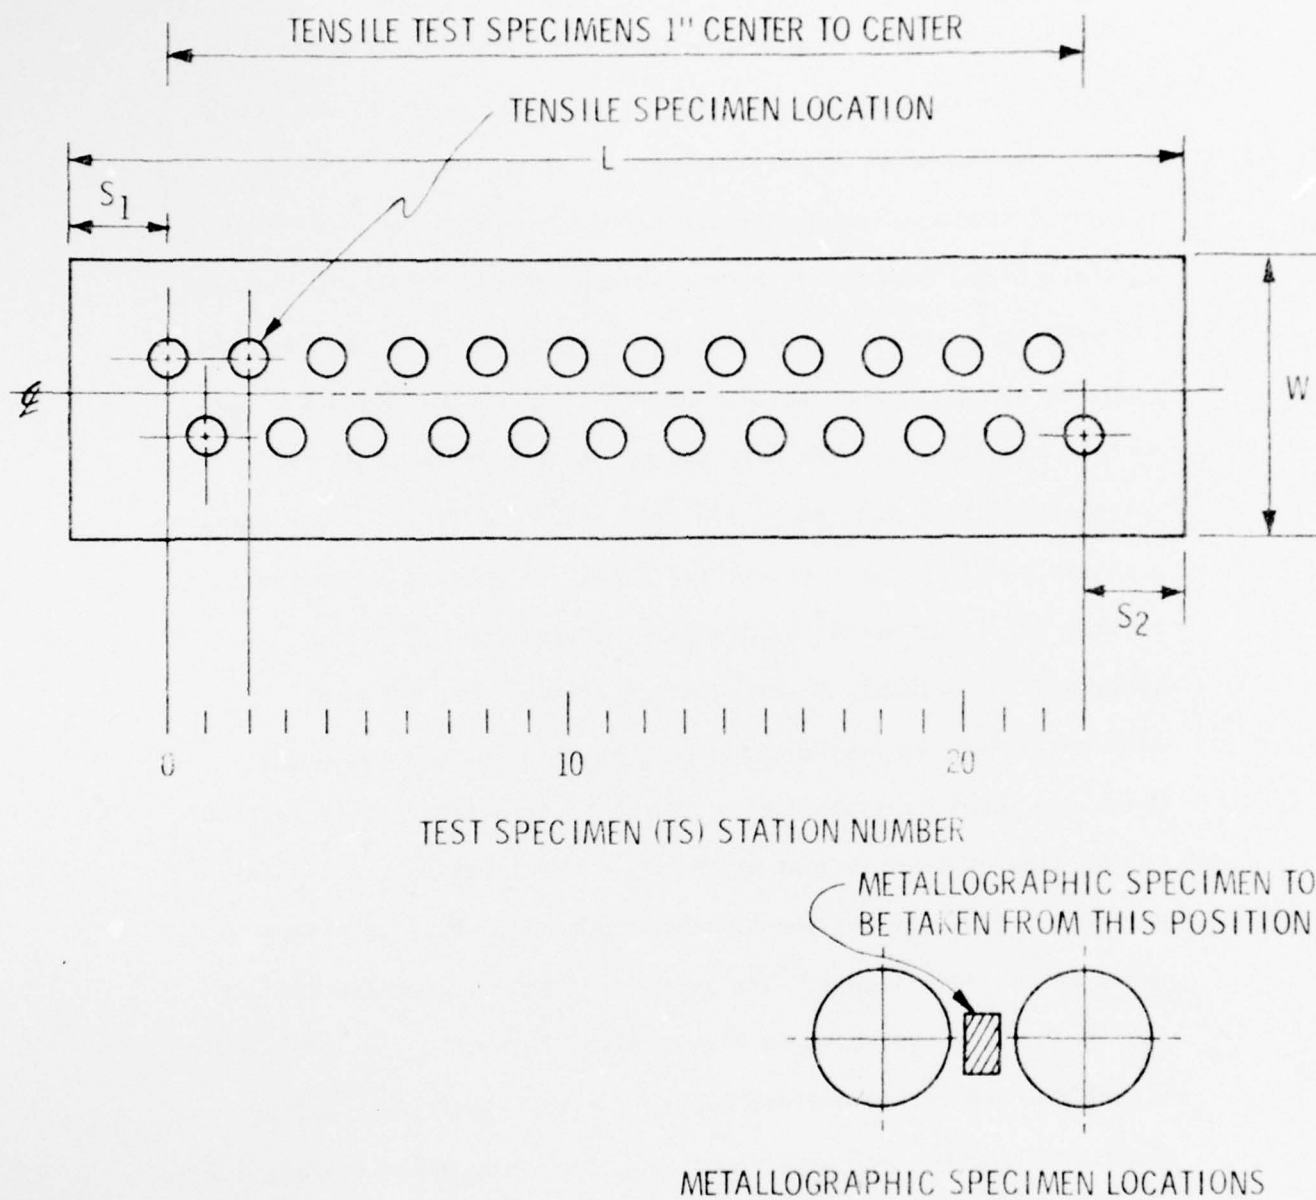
Length of Weld Test Specimen Arrangements
